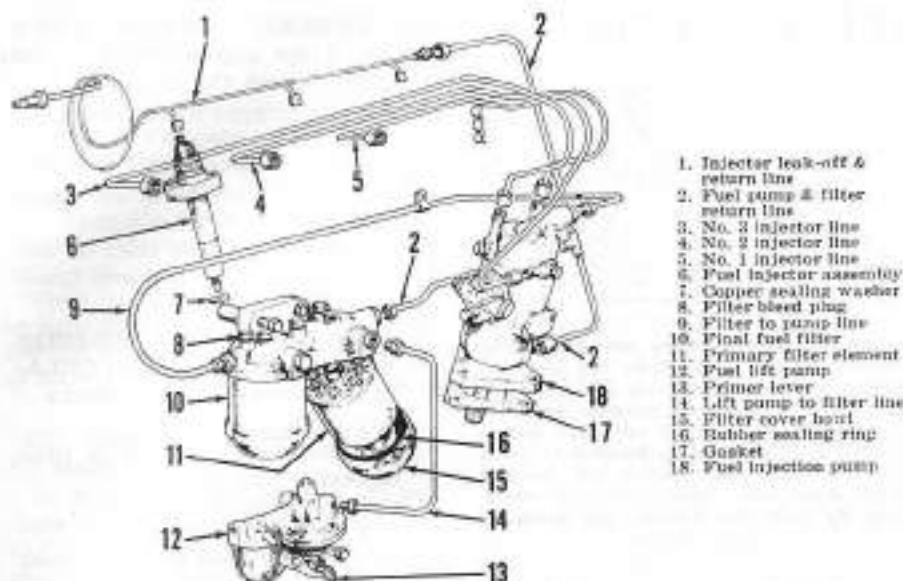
Drawing showing lay-out of diesel fuel system for all 3-cylinder diesel engines. Fuel lift pump provides fuel under pressure to inlet side of primary filter (11); however, return line (2) is connected to outlet side of primary filter so that final filter inlet pressure is by gravity only. Thus, disconnecting return line (2) from injector leak-off line (1), then plugging return line (2) will facilitate bleeding system.
